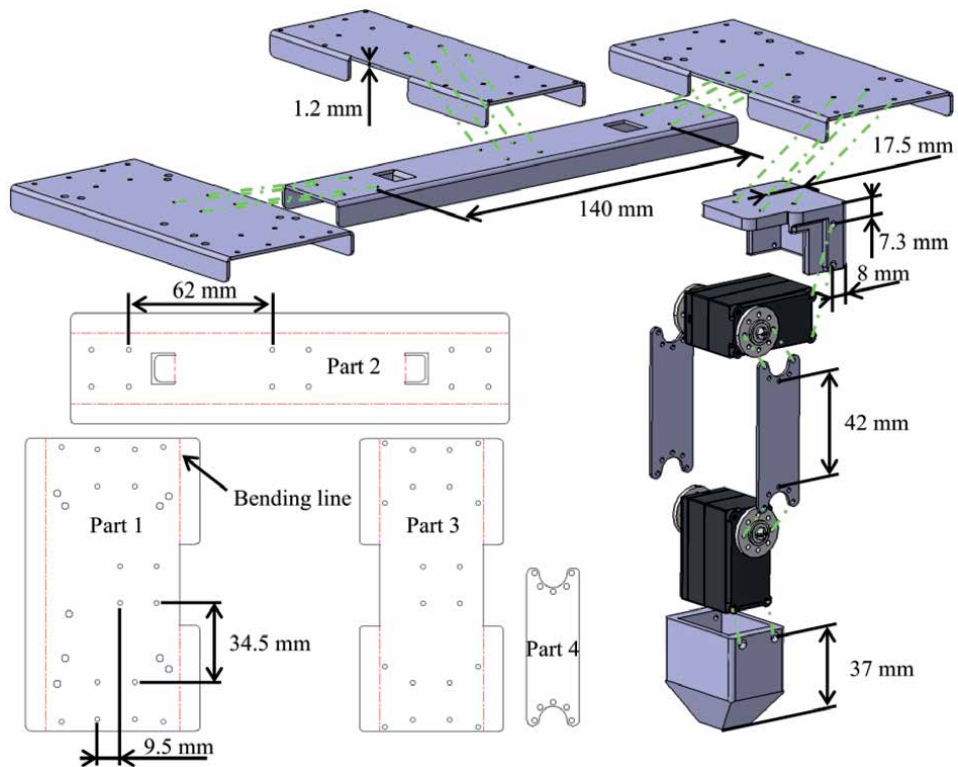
Mechanical parts of the quadruped robot system. Part 1, 2, 3, and 4 were machined using the CNC system and bender.
